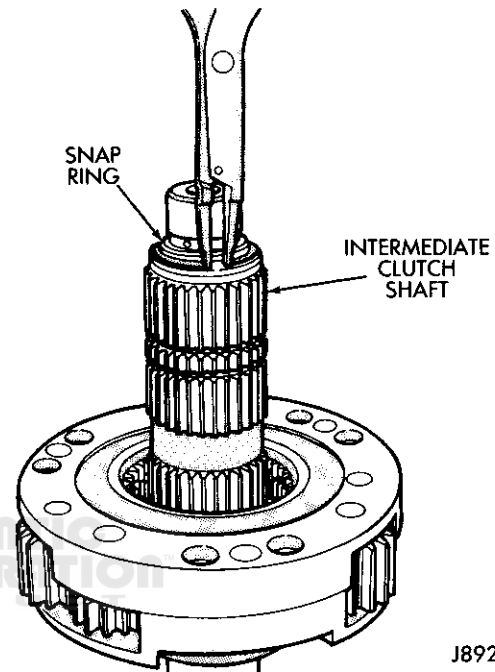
Removing Intermediate Clutch Shaft Snap Ring
